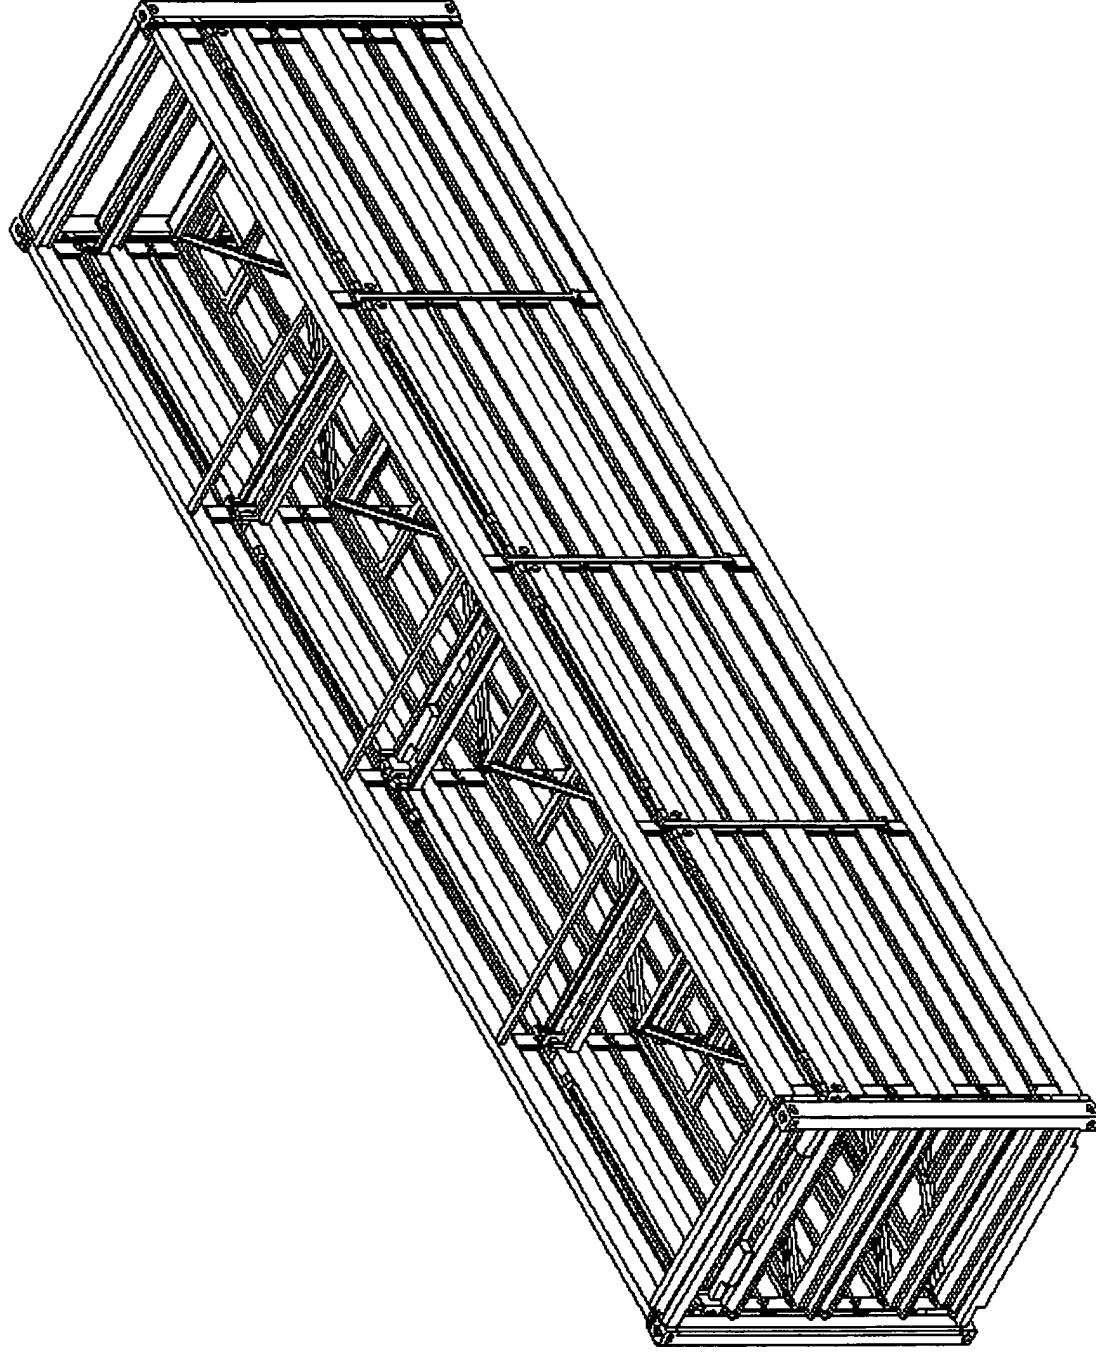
B: Step8 of disassemble and load process: The six vertical beams are assembled.
